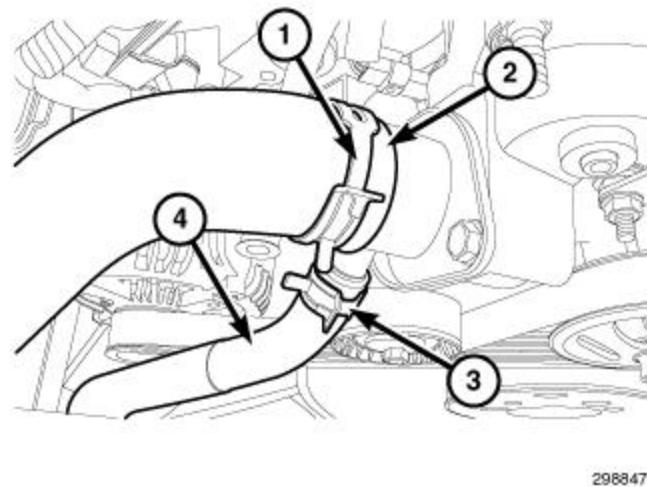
Upper Radiator Hose, Clamp, Oil Cooler Return Line Hose & Clamp
